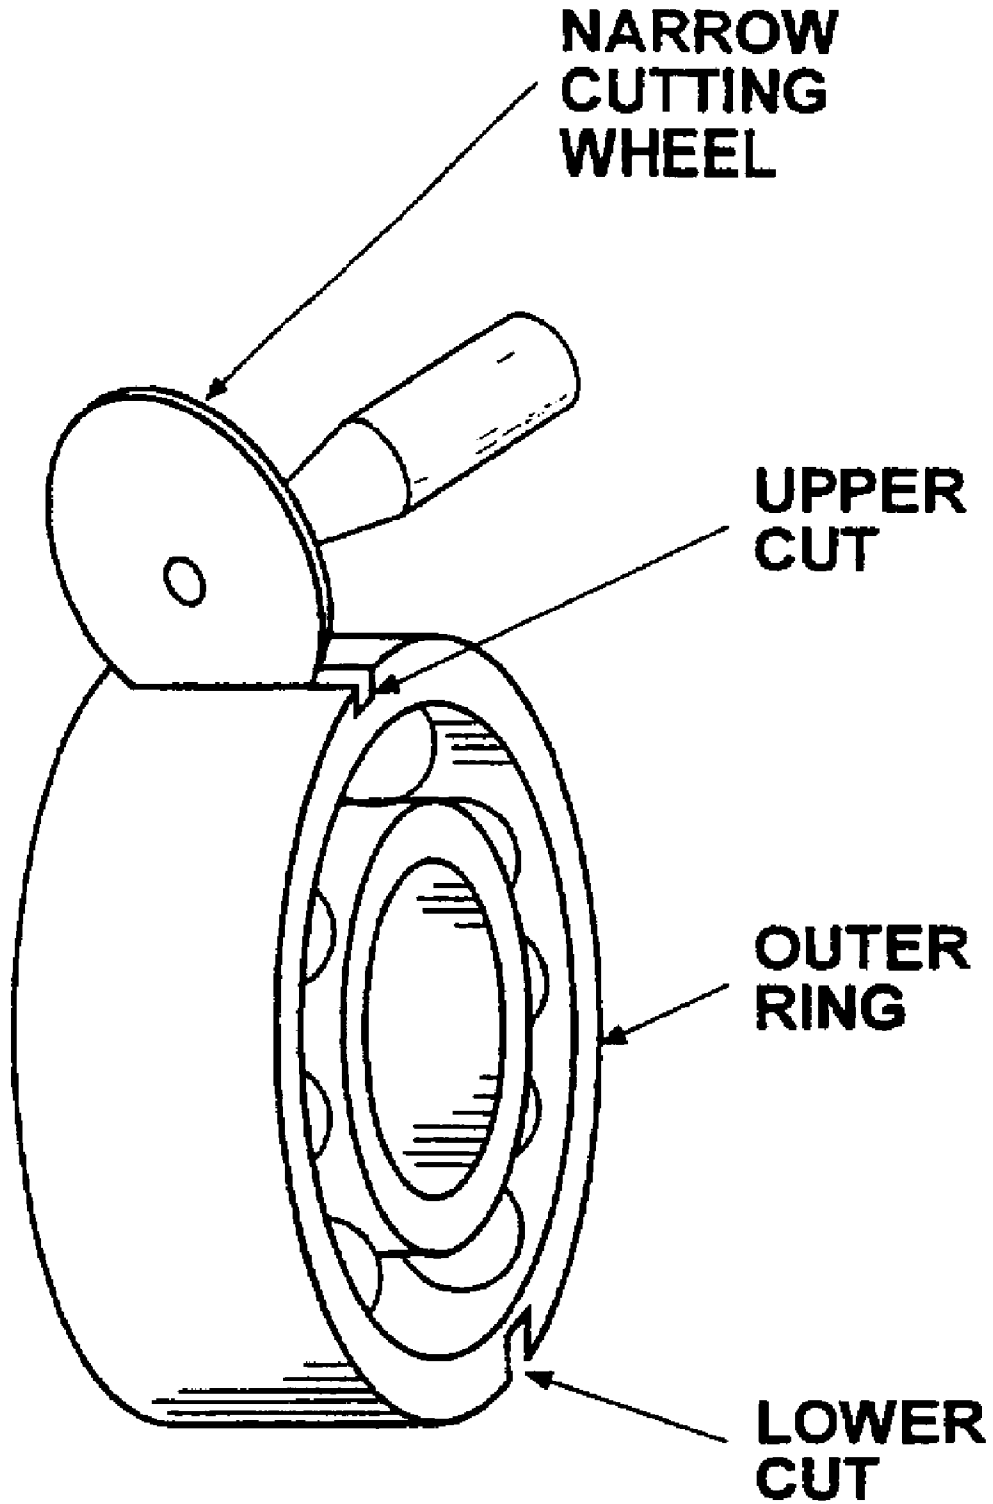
Using a High-Speed Grinder to Cut Outer Ring
